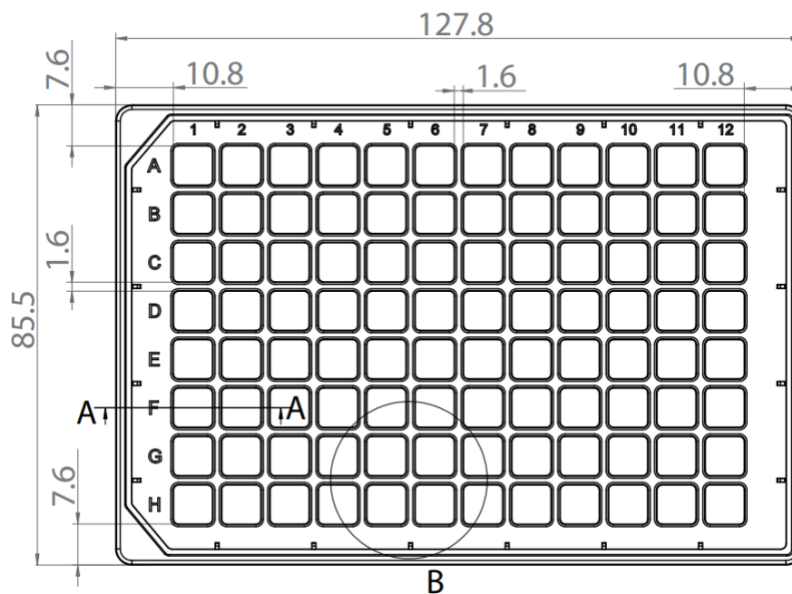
Geometry and dimensions of the μ -Plate 96 Well Black made by Ibidi.
